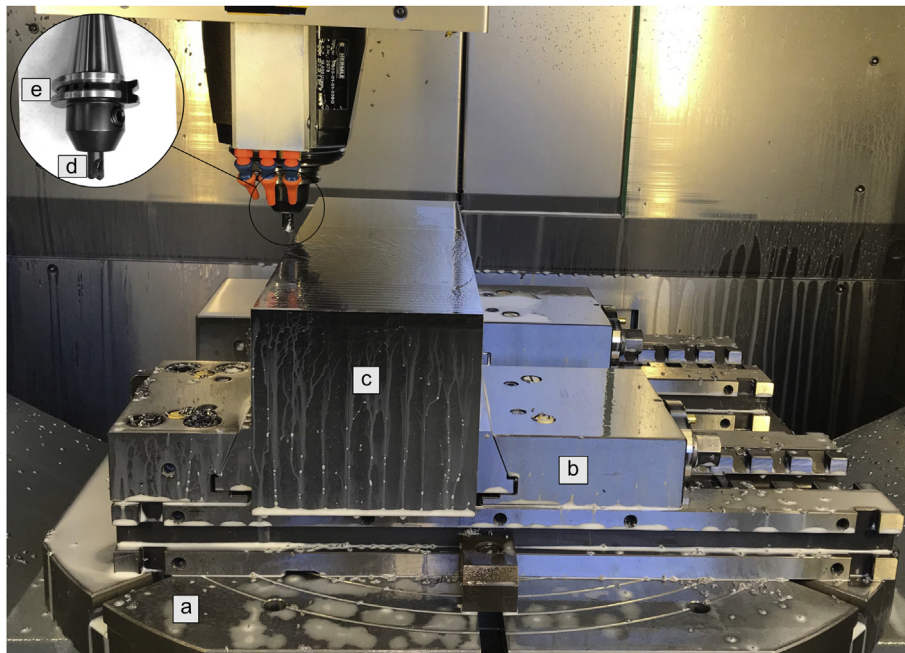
Shows the experimental setup, where a) is machine table, b) vises, c) workpiece, d) shoulder mill, and e) Weldon adapter.
